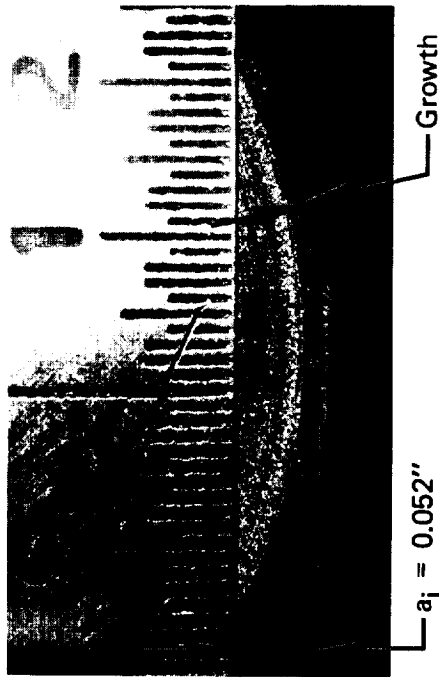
FRACTOGRAPHS OF INCONEL 718 FORGING SPECIMENS
